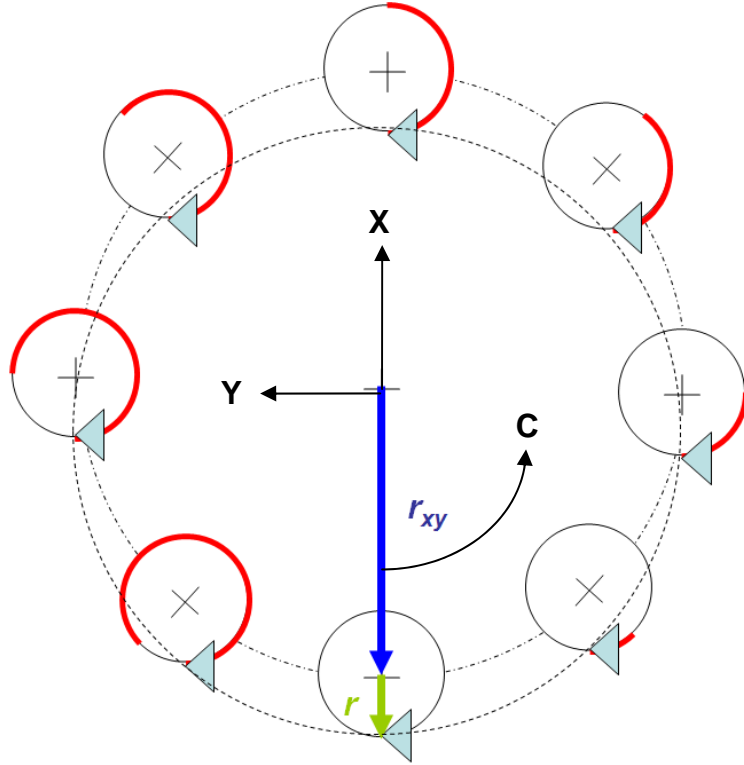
Illustration of the motion of two linear and one rotary axis to produce an off-center circle with the Ultramill. A full circle is cut after one revolution of the spindle.
